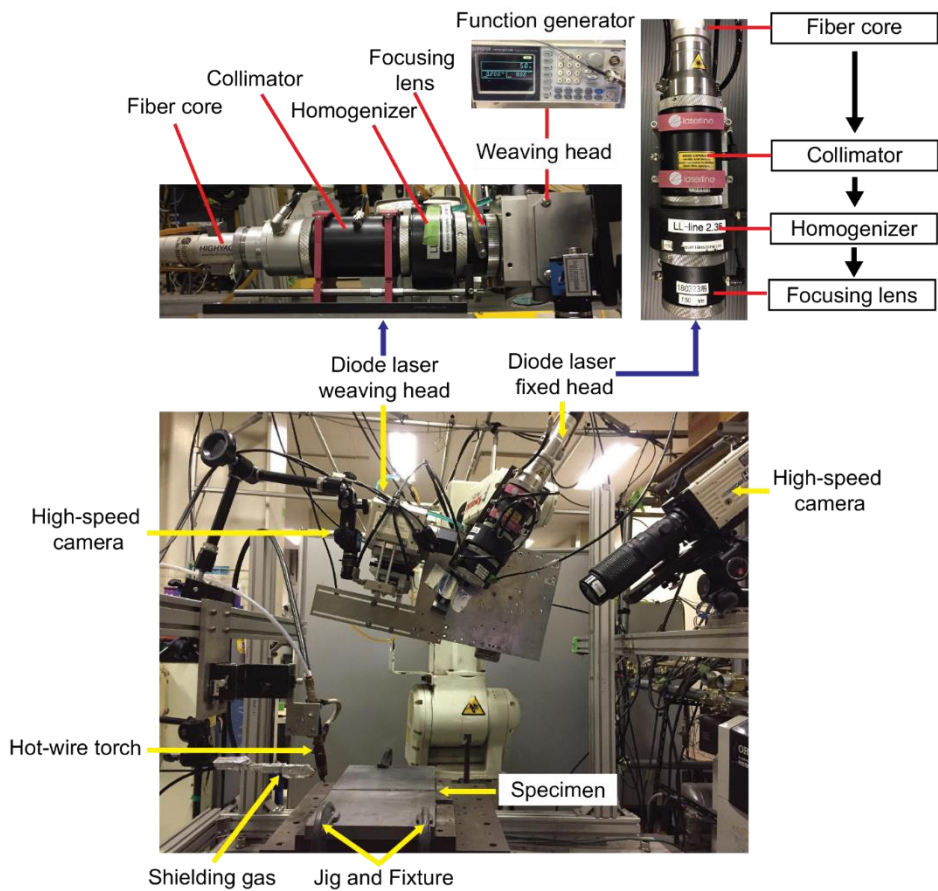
Appearance and equipment for hot-wire laser welding using weaving system.
